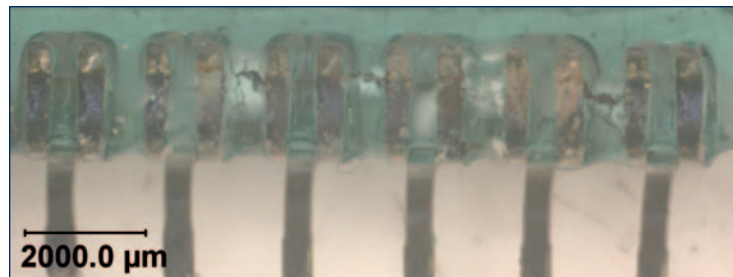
Uniform corrosion observed over all of the metallic surfaces.
